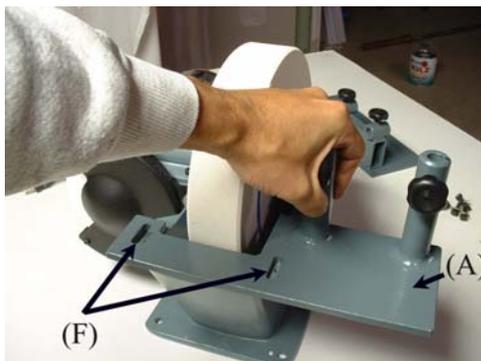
Alignment of base with machine. Fig 8. Alignment of toolrest and mount bases
